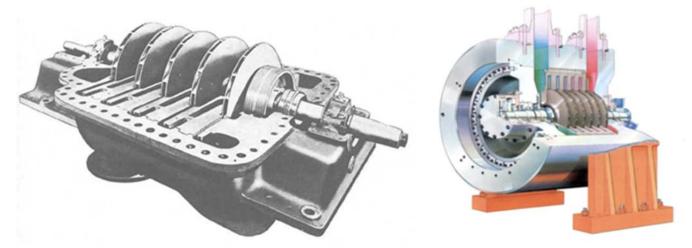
Section views of a multi-stage compressor with shrouded impellers
